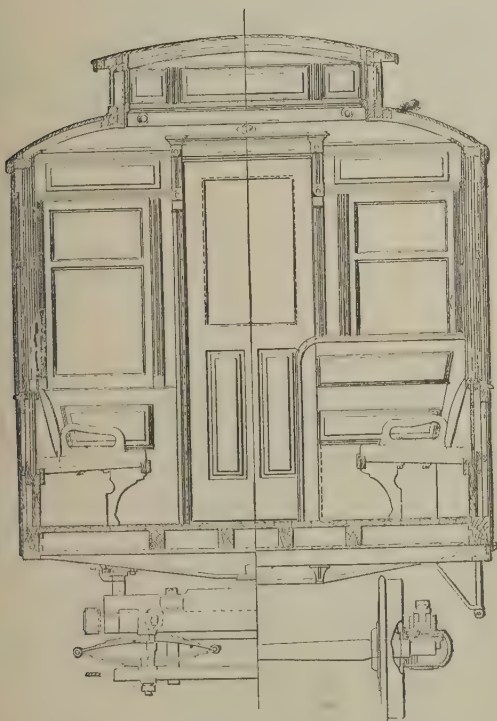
CROSS SECTION—ELEVATED CAR.
